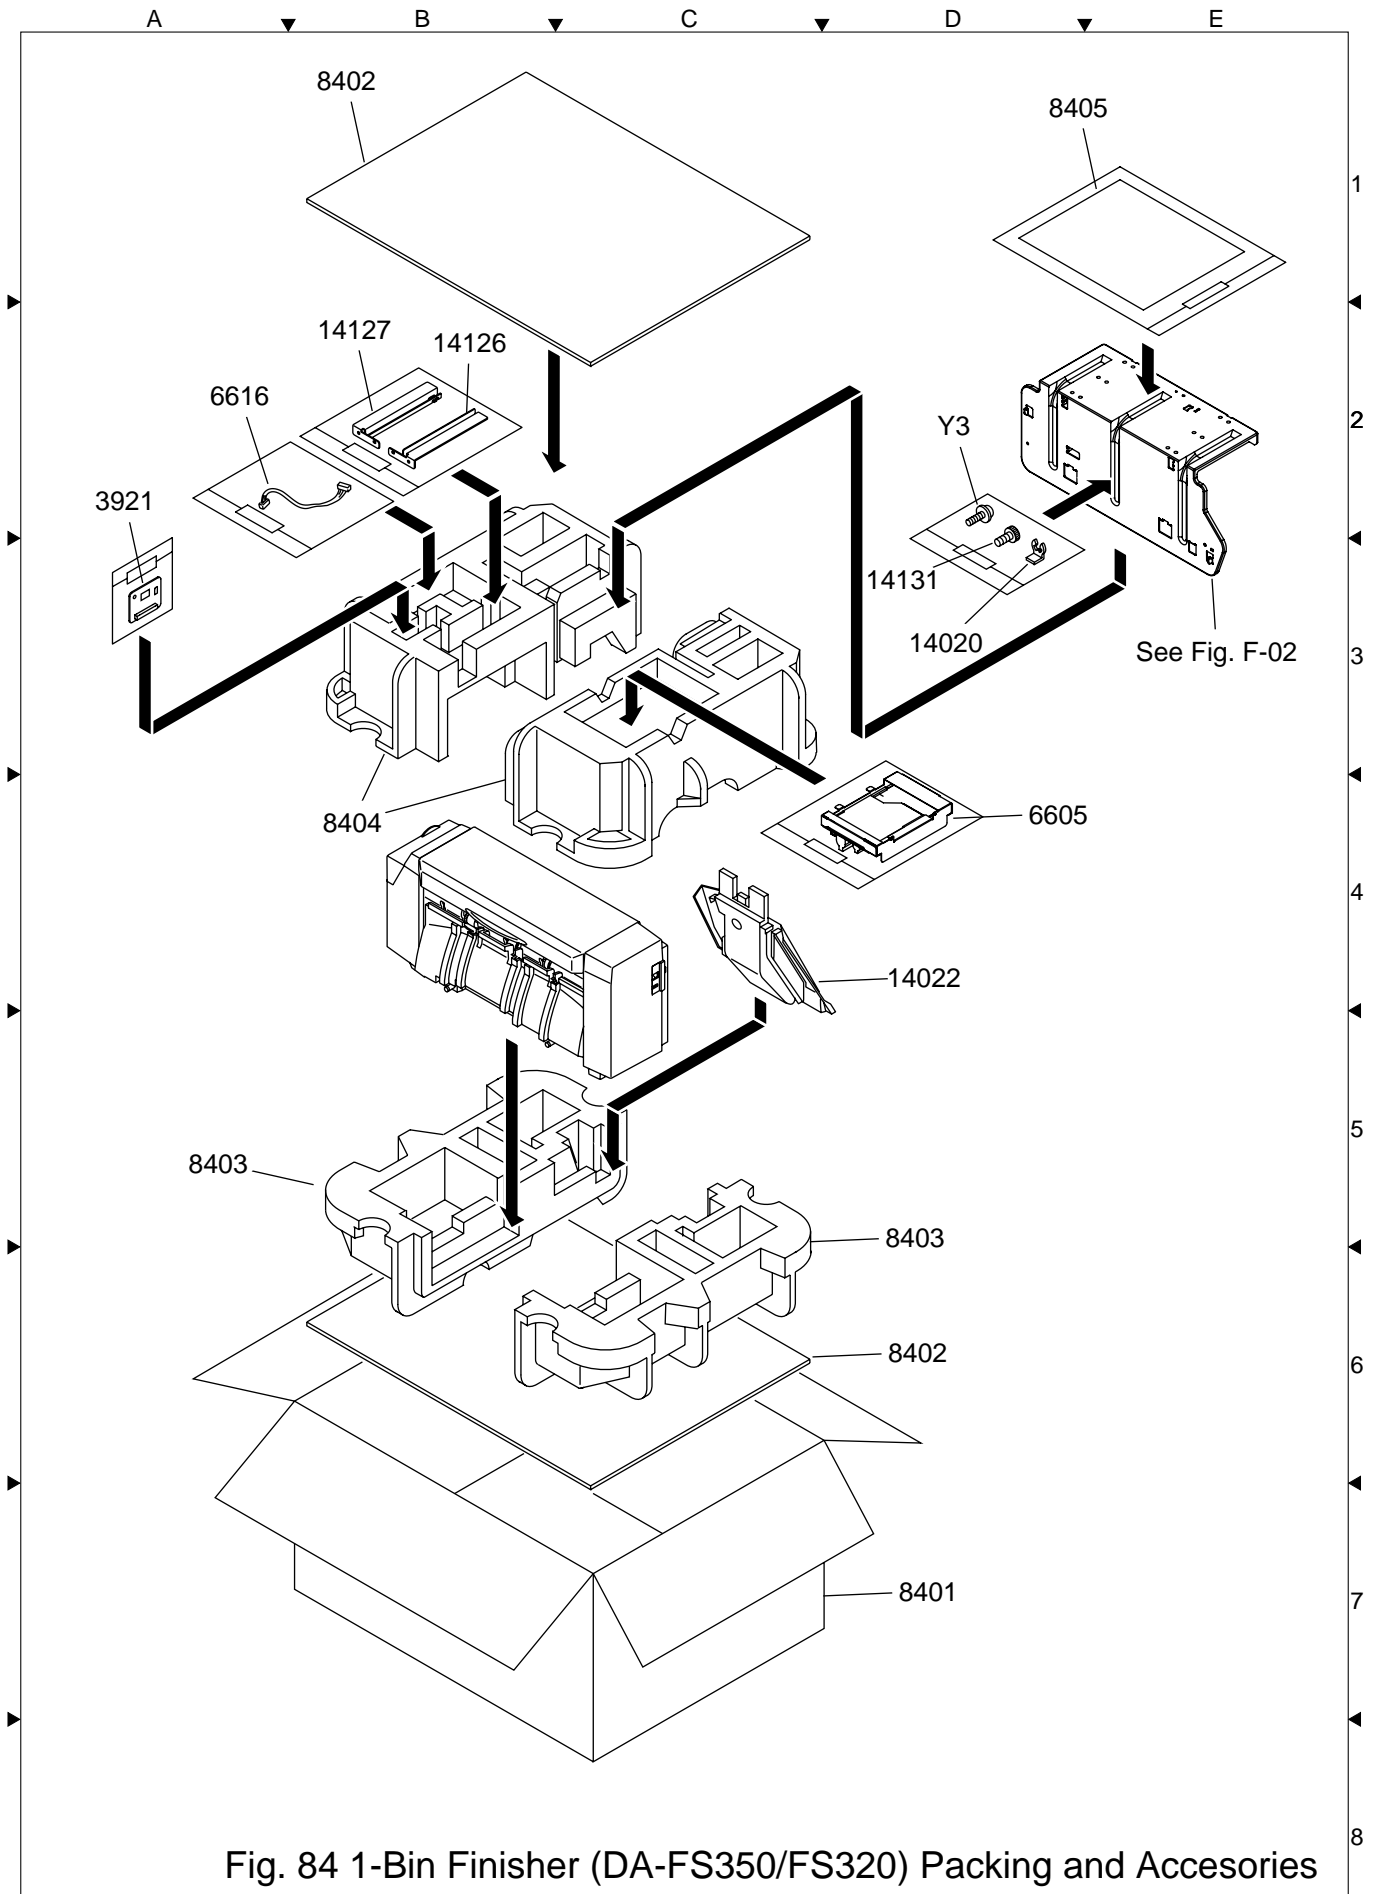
1-Bin Finisher (DA-FS350/FS320) Packing and Accesories
